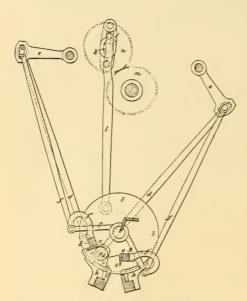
Jardine's elliptical gearing arrangement for "Go-through" machines.
